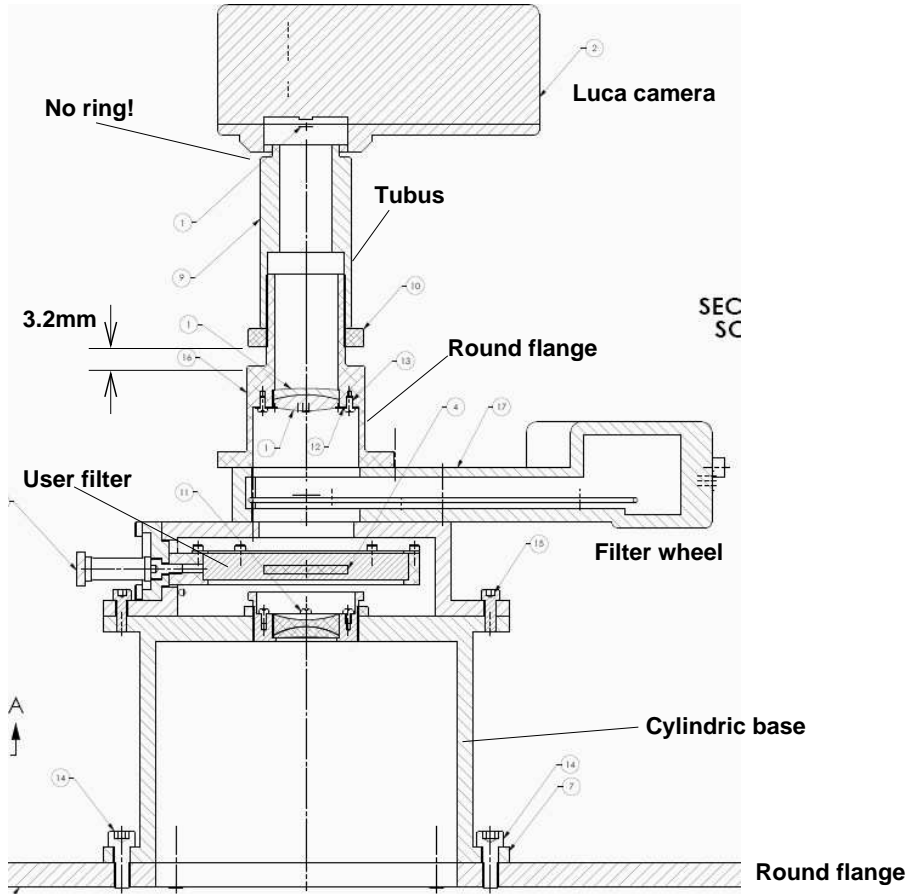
Fragment of the HRCam assembly drawing CH2041-1000-00040.pdf.
